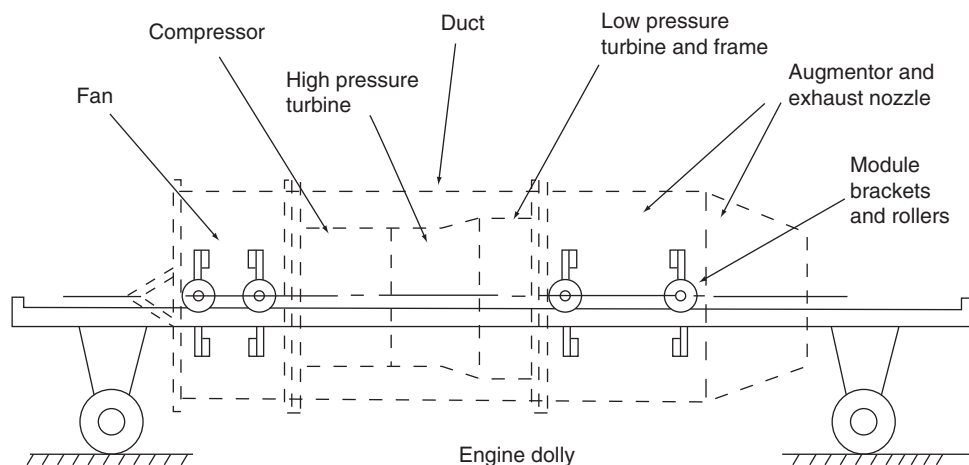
Modular engine and dolly arrangement [19-2].
